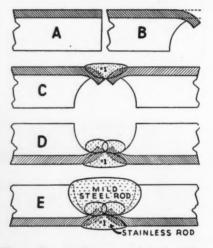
Steps in the new method of welding stainless-clad steel.
